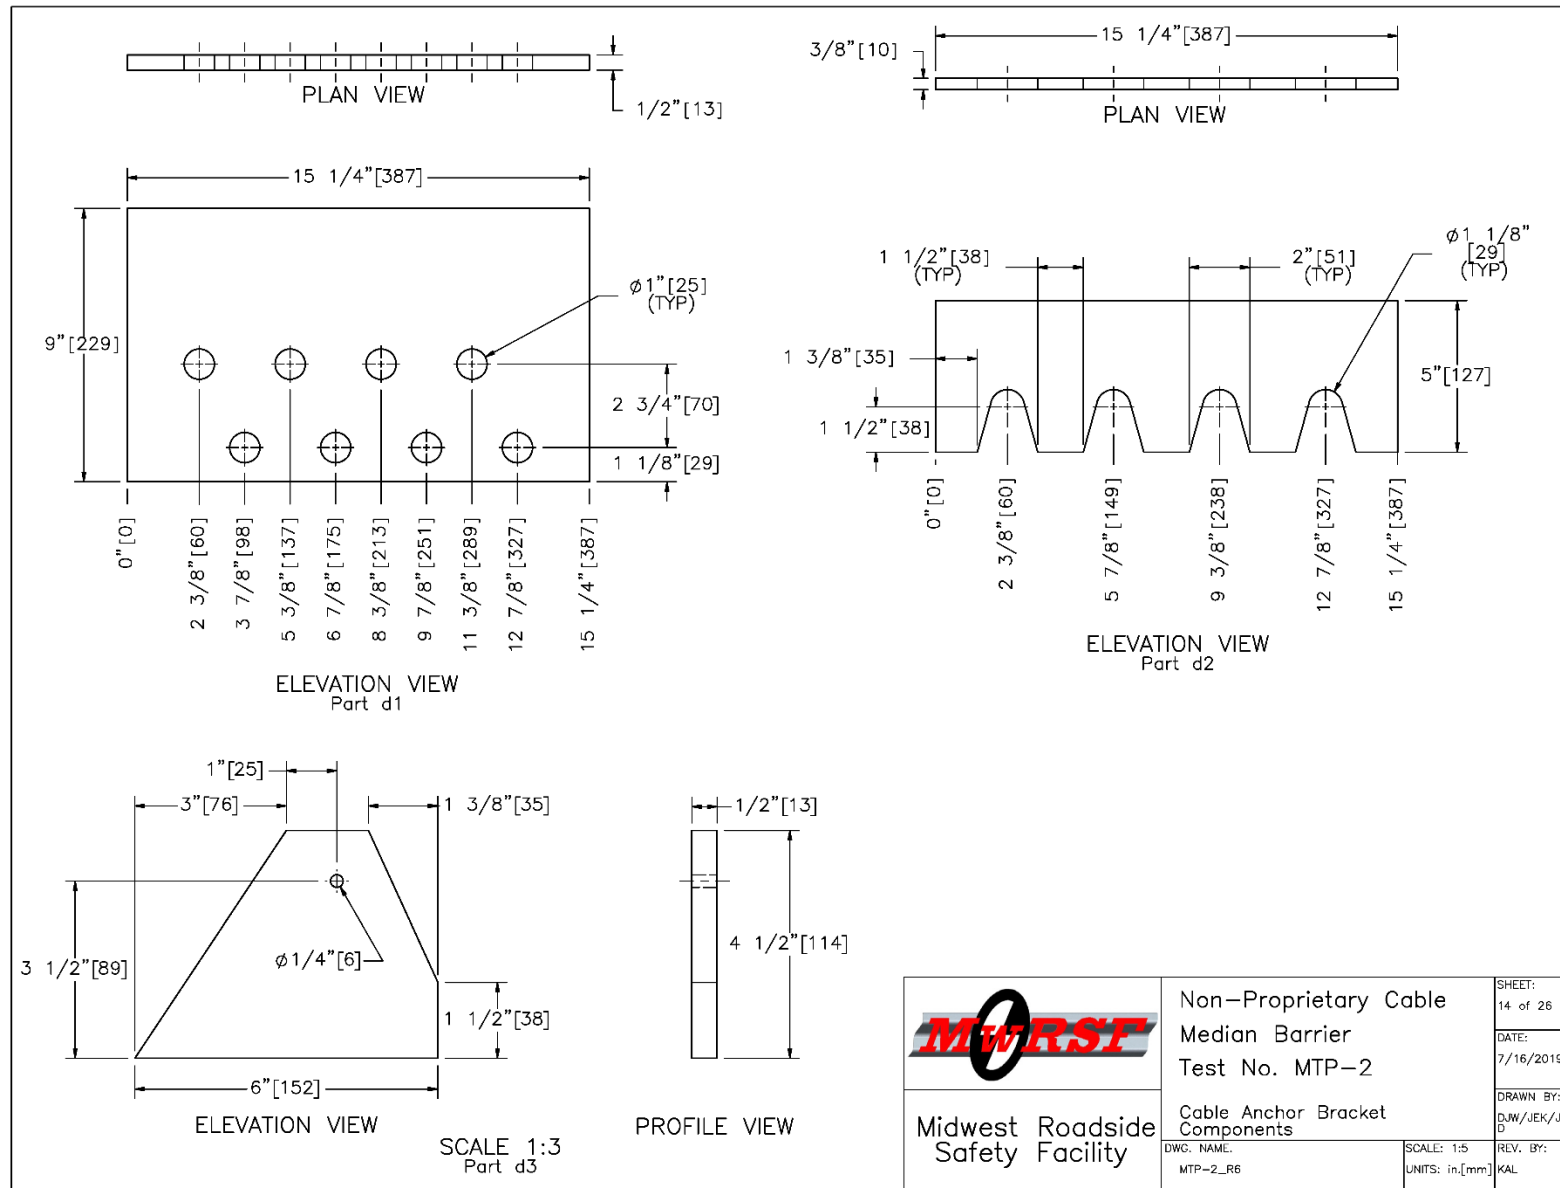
Cable Anchor Bracket Components, Test No. MTP-2
